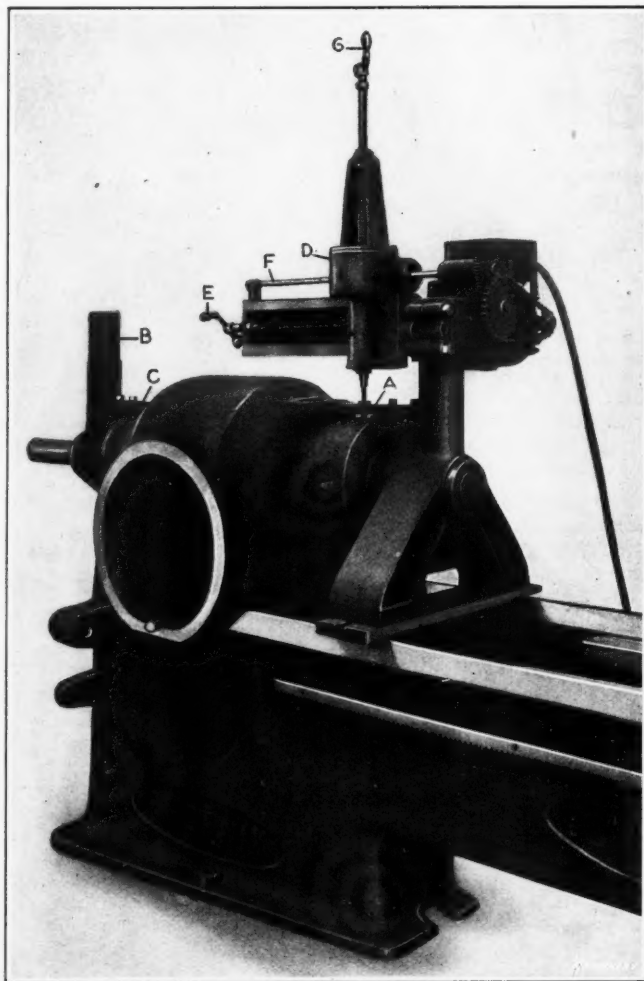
Portable Radial Drilling Machine engaged in drilling Holes for Oil Cups and Wedge Clamping Screws
